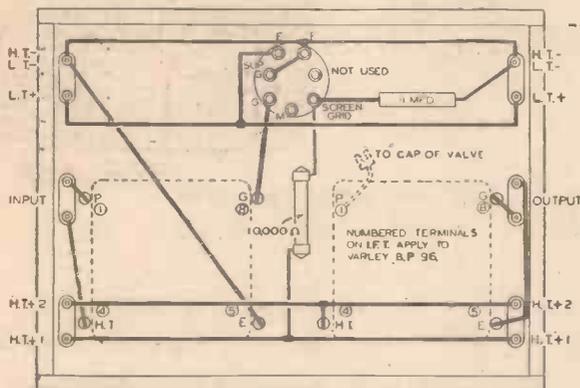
Wiring of the unit. Connections are shown for both four- and seven-pin valves. With some metallised seven-pin valves, the terminal marked M should be connected to H.T.—
